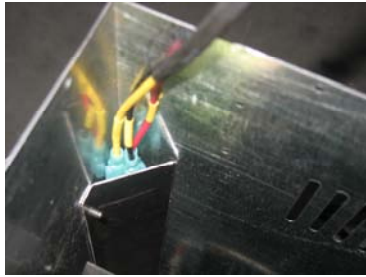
Important: Insert the wires marked with AUTO, OFF and MAN into line slot on the right corner. Try the best to make them close to the bottom.
